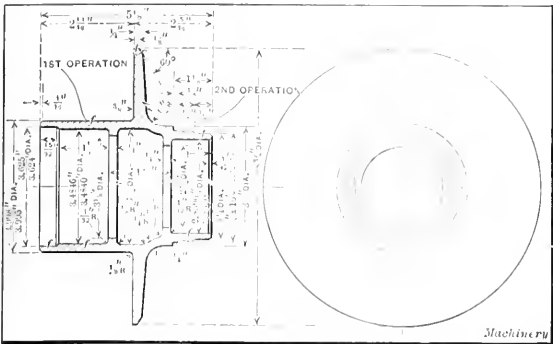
Automobile Wheel Hub made from a Malleable Iron Casting and machined Complete in 7 1/2 Minutes
